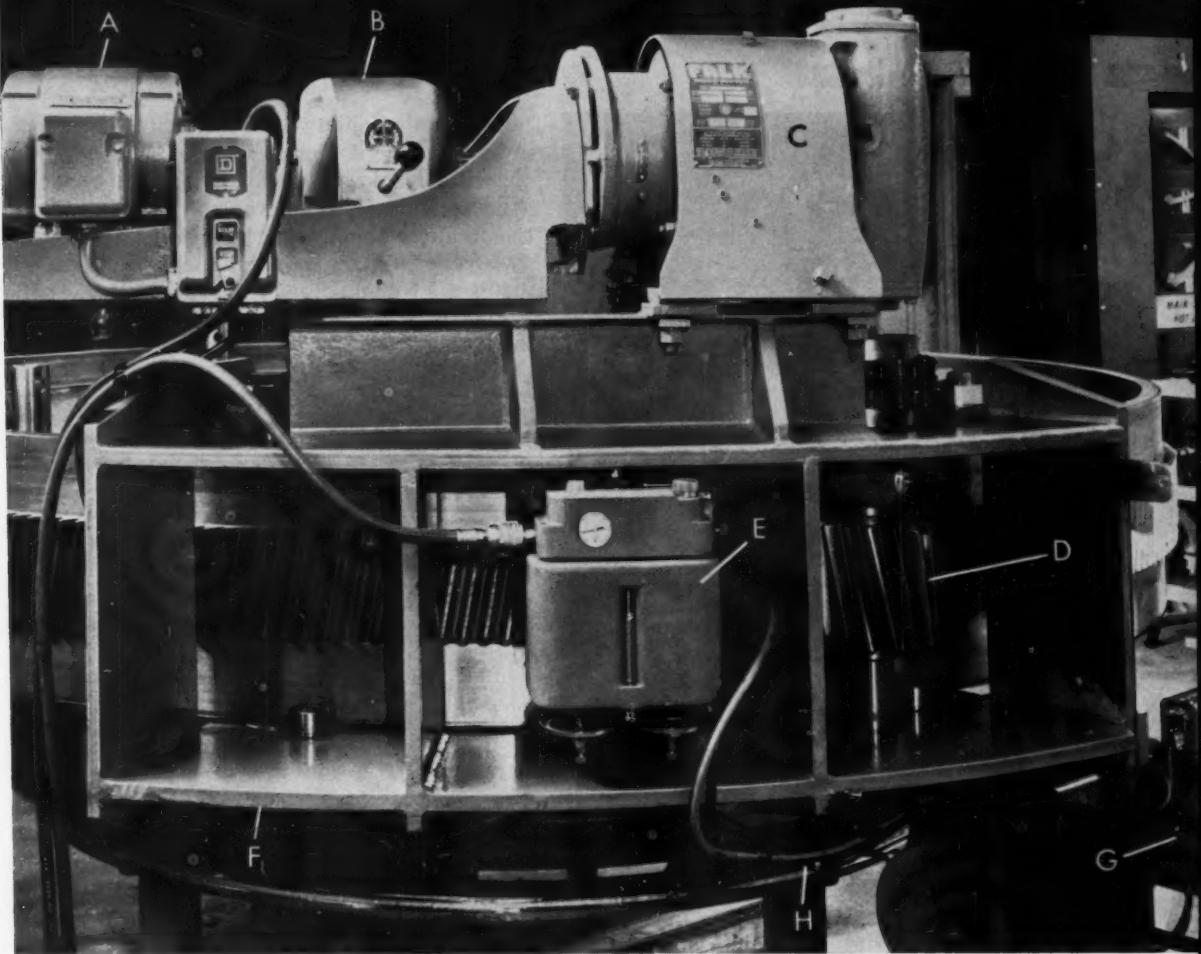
Carriage and components of the seal-weld cutter showing: (A) motor, (B) speed shift, (C) reducer, (D) drive pinion, (E) mist-coolant reservoir, (F) carriage, (G) cutter-spindle motor, and (H) seal to be cut in order to open the reactor vessel.
